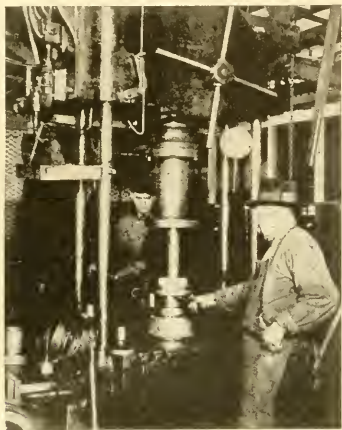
FINAL TIGHTENING OF COMMUTATOR WHILE HOT AND UNDER PRESSURE
